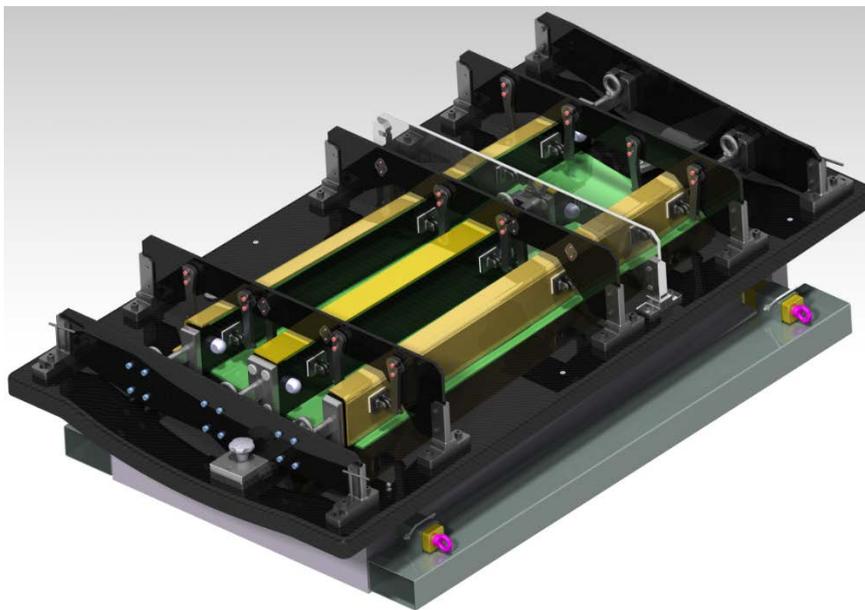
FITCoW Small-scale Tooling Assembly in its final configuration
